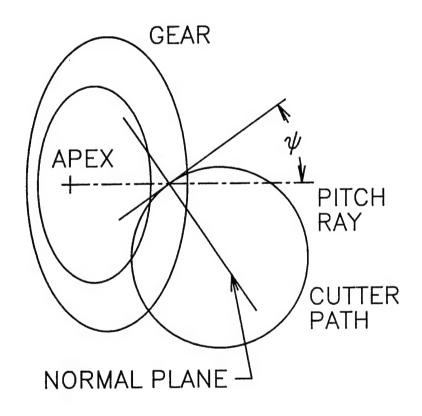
PITCH PLANE OF A SPIRAL— BEVEL GEAR
